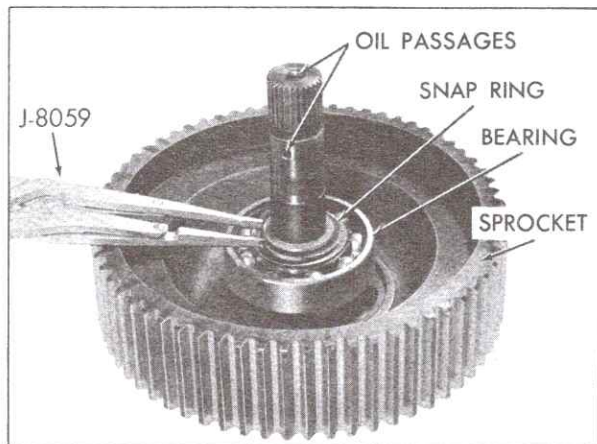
Removing Sprocket Bearing Snap Ring
